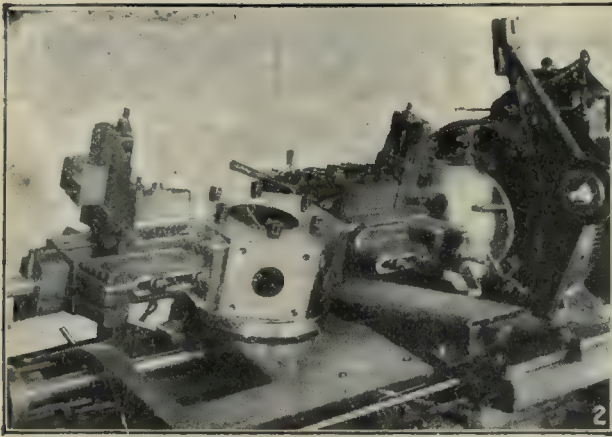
FACING GEAR SIDE OF CRANKCASE
